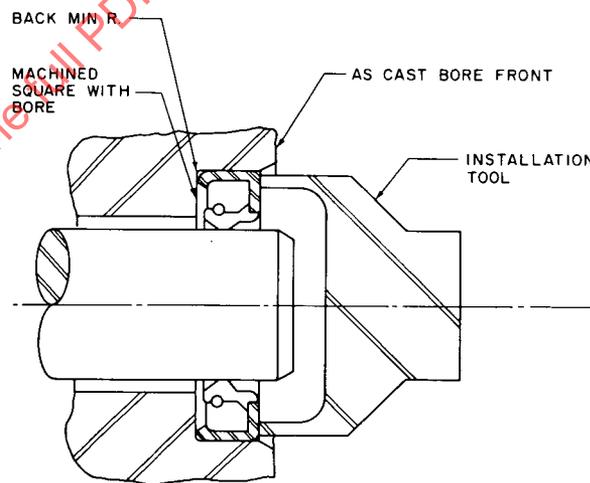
BOTTOM BORE: SEAL BOTTOMS ON MACHINE BORE SHOULDER
